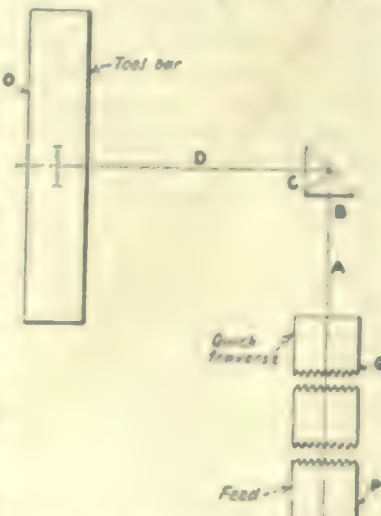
SKETCH OF BORING MILL SCREW CUTTING ATTACHMENT
